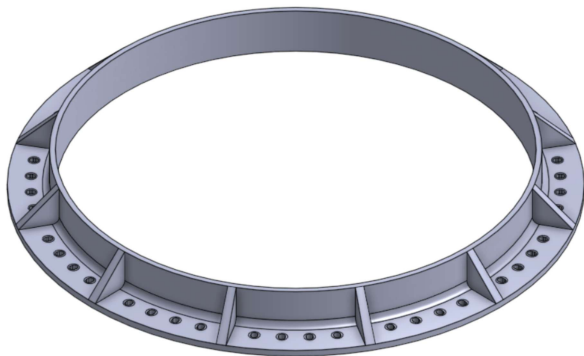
First Base Plate Design With One Layer of Bolts
